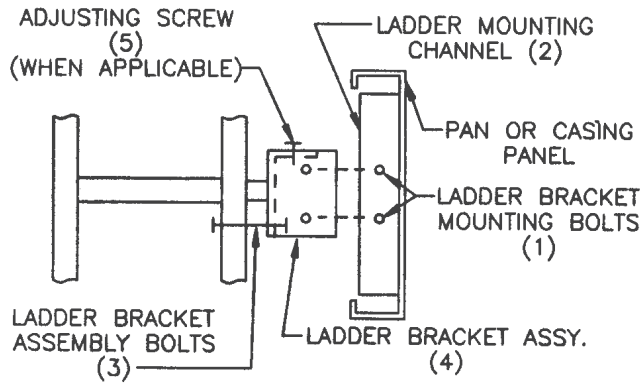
Detail of Ladder, Ladder Bracket Assembly and Mounting Channel
